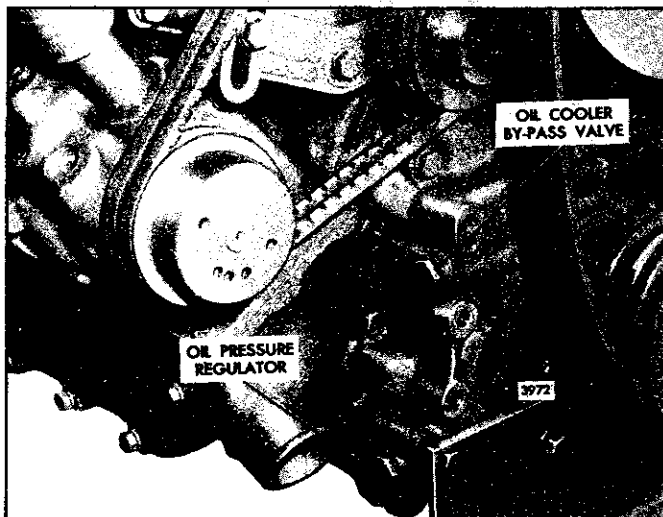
Location of Former Oil Pressure Regulator Valve (6V Engine)
